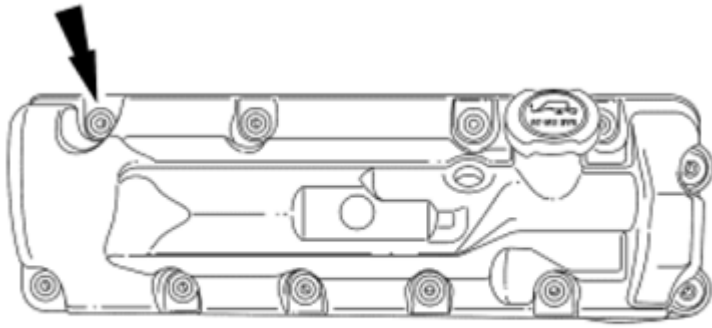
Locating LH Valve Cover Mounting Bolts And Studs
